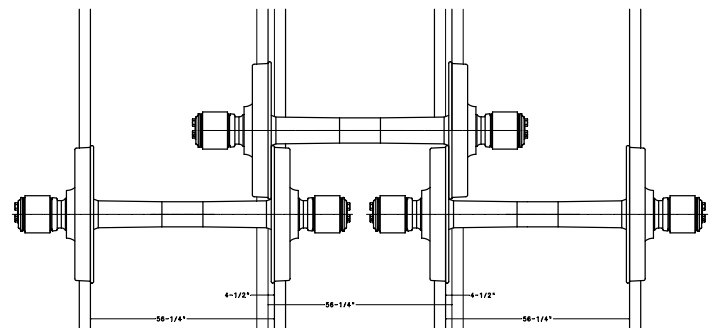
Recommended storage spacing dimensions for shipping passenger car wheel and axle assemblies with bearings applied.
